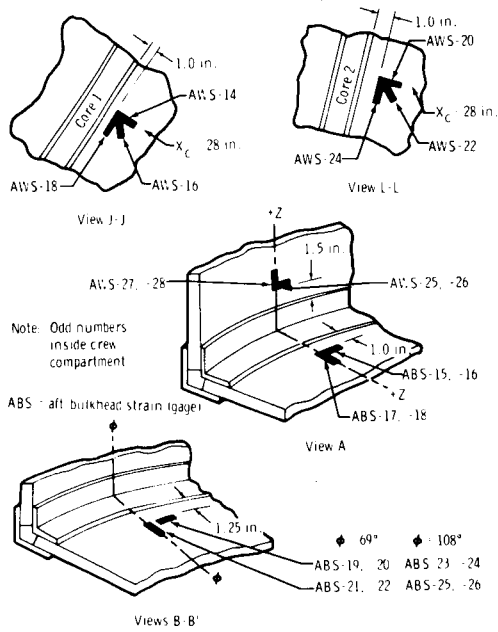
Details of aft-sidewall strain-gage locations for test 16 with BP-28A.
